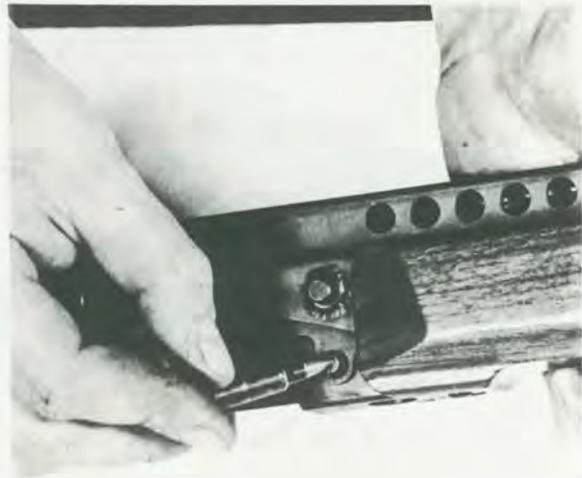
Removing the magazine adapter assembly retaining pin.
